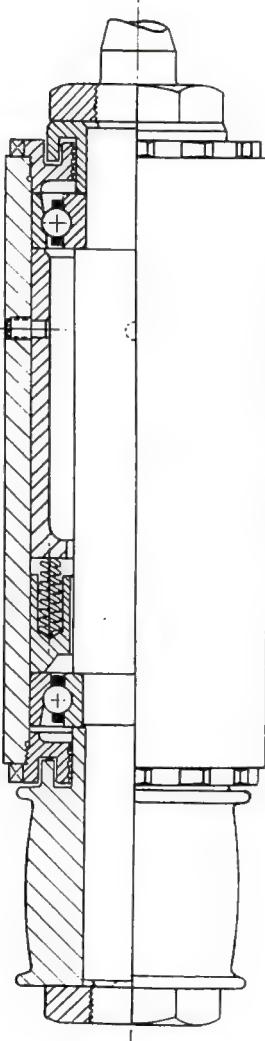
Ball Bearings to Internal Grinding Spindle.
